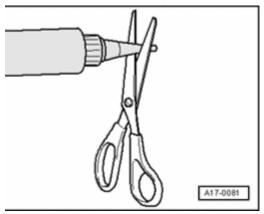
Cutting Tube Nozzle At Front Marking Courtesy of VOLKSWAGEN UNITED STATES, INC.
